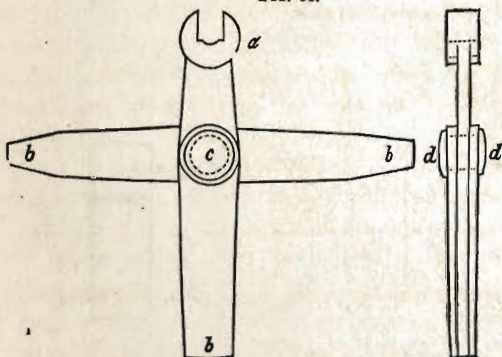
Screw-driver, half size, two views. *a*, cone-wrench; *b*, *b*, blades; *c*, rivet; *d*, *d*, collets for rivet.
